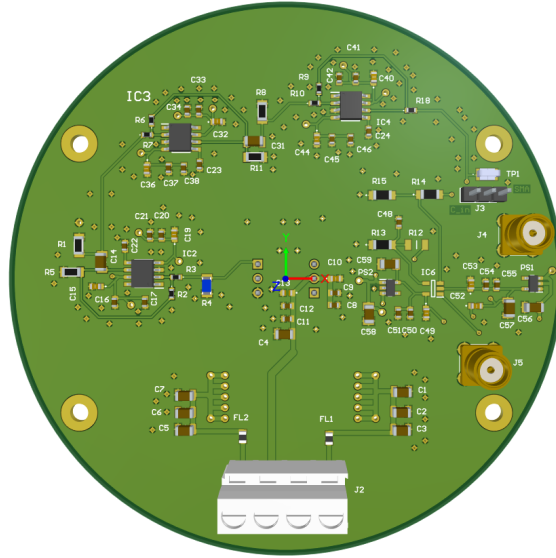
Picture of the alternative UWOCs receiver PCB layout
